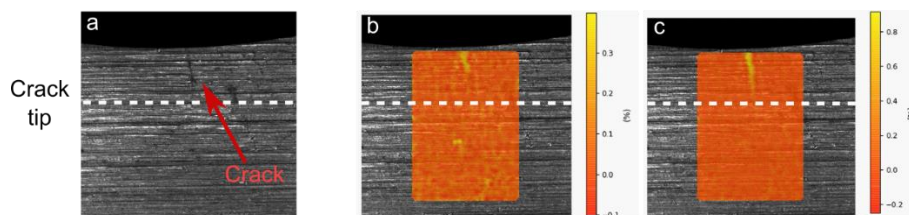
Imaging of the crack opening, (a) photo of the crack before the loading, (b) deformation around the crack for a 15 kN loading and (c) a 24 kN loading.
